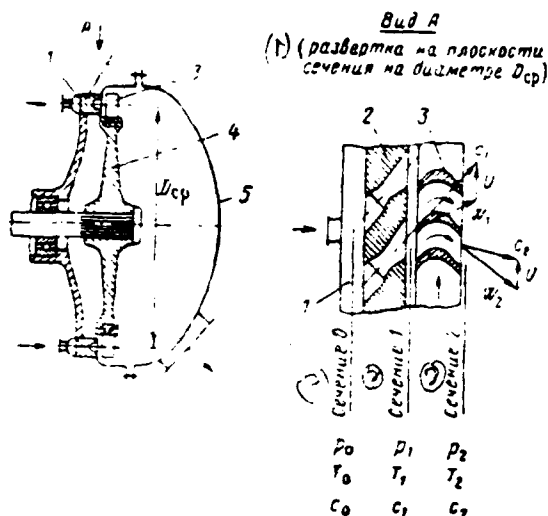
The schematic of the single-stage axial-flow turbine: 1 - inlet manifold; 2 - nozzle cascade; 3 - rotor blades; 4 - disk; 5 - exhaust collector/receptacle.
